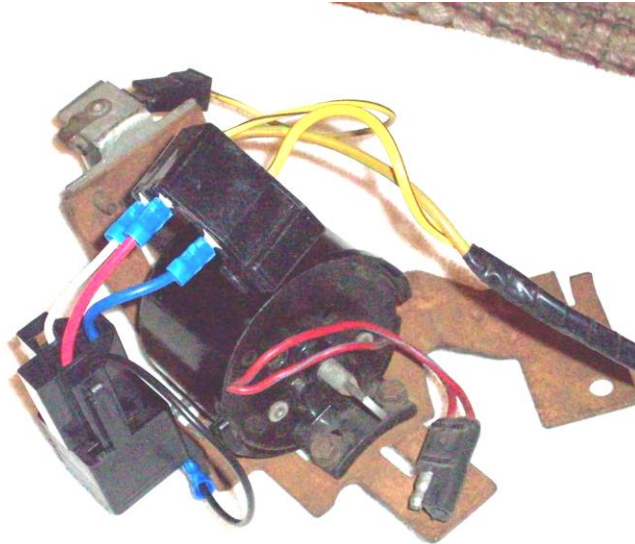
Wiring installed. (1969 Wiring harness/bracket shown.)
